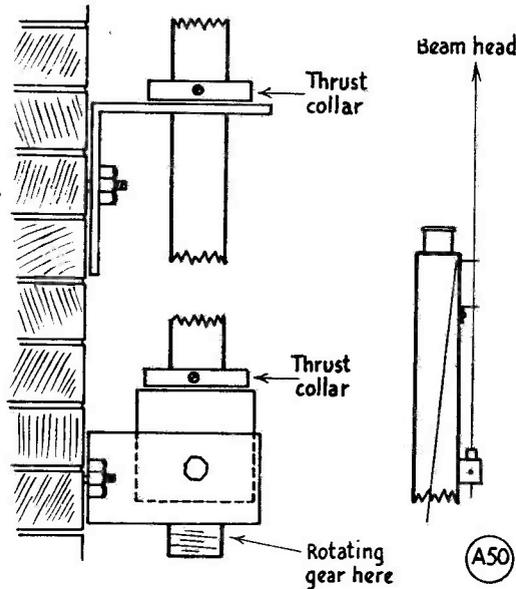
General layout of beam support and rotating member. The thrust collars should be spaced as far apart as possible, with their supporting brackets accurately in the vertical.
